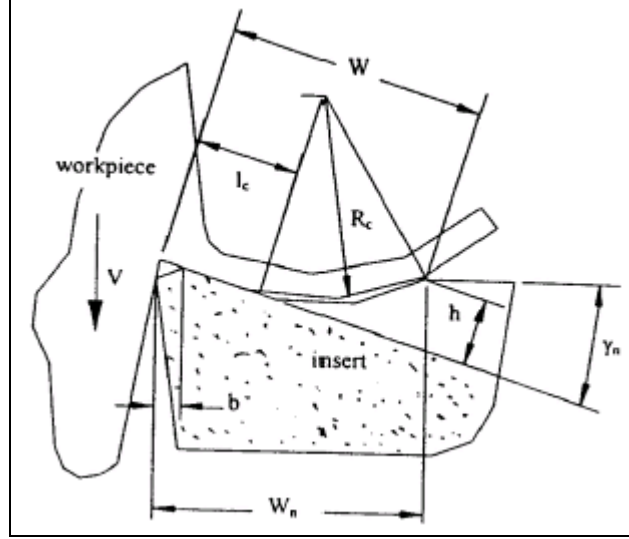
Chip Up-Curl Process with Grooved Cutting Tool (Li. Z 1990)
